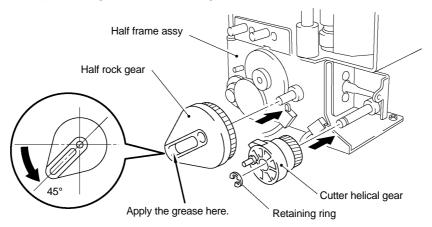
Reassembly of the Cutter Helical Gear and the Half Rock Gear
